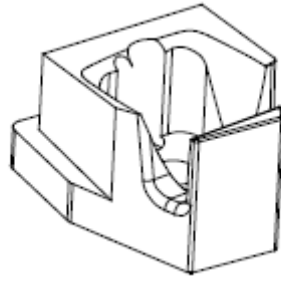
Visual representation of the contact lug where the support bearing is placed when attaching to the car body.
